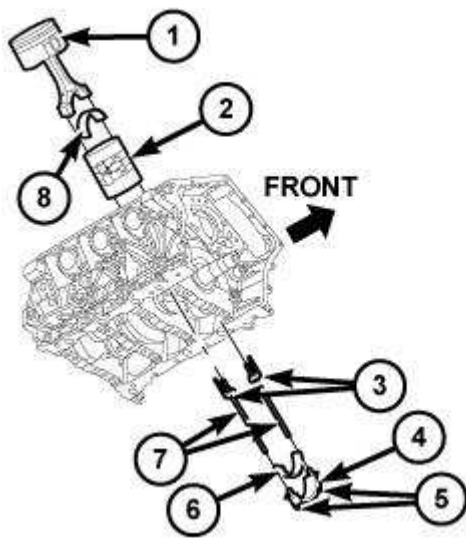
Piston, Connecting Rod Cap, Bolts, Plastic Guide Plates & Guide Pins
